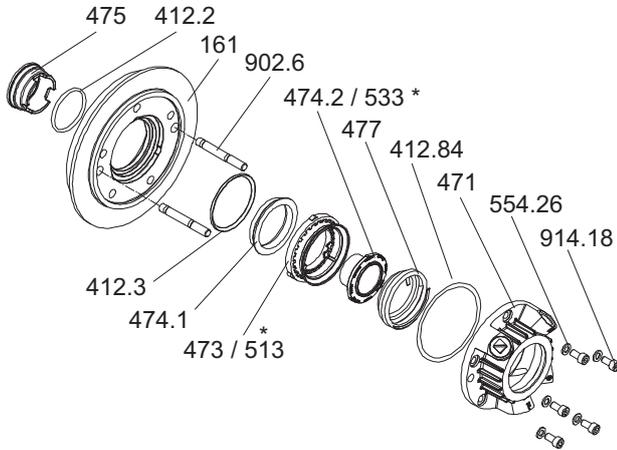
Dismounting the ALFA KSS RS/D cover casing sub-assembly
